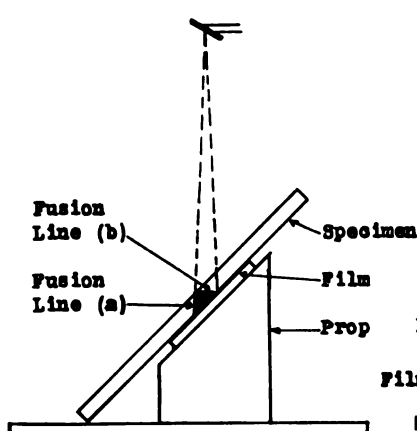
A Butt Weld With Bevel at 45° Angle. A Second Exposure May Be Made at Right Angles to Show Fusion Line (b).
